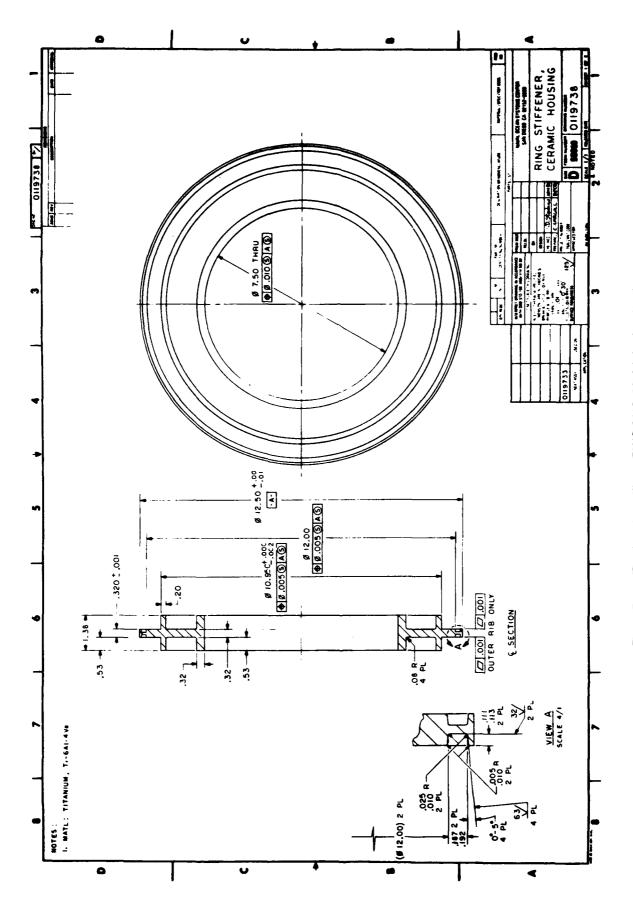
Titanium ring stiffener DWG 0119738; fabrication drawing.
